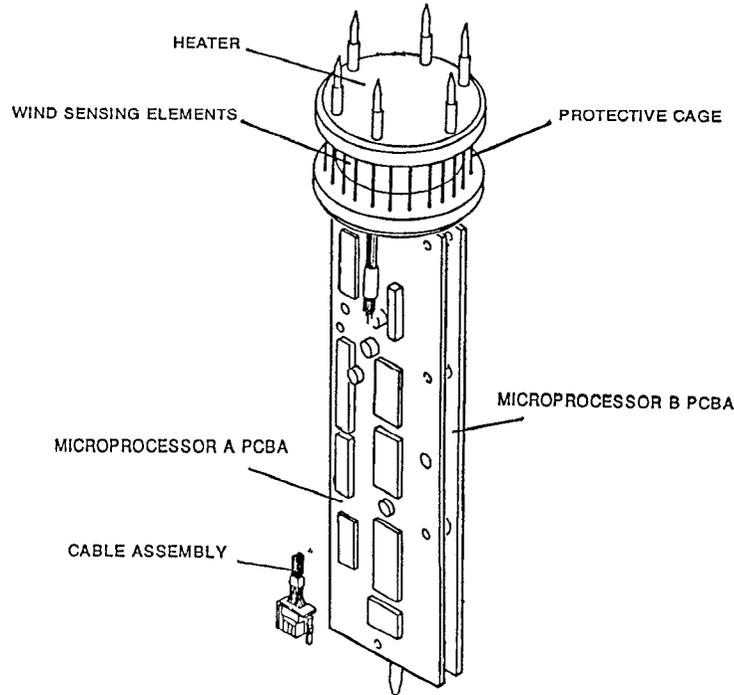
Wind Speed and Direction Sensor, Control Assembly
